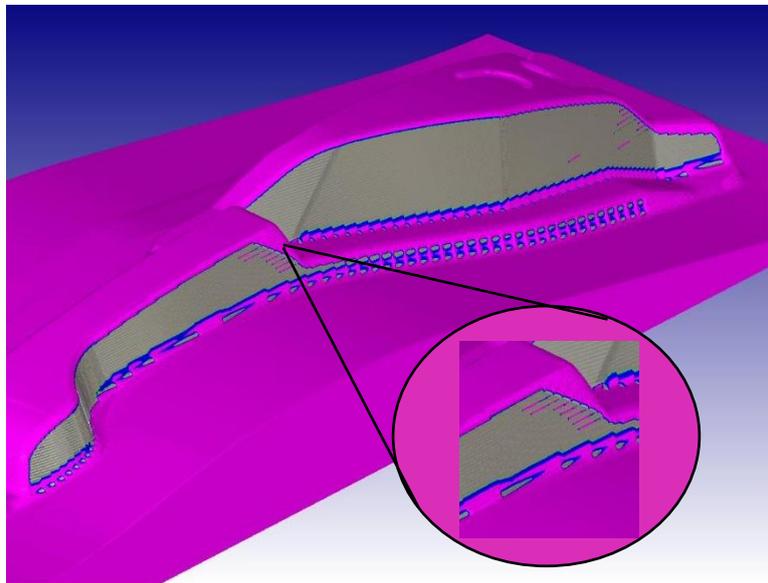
Finishing simulation with a spherical cutter on a 3-axes CNC machine.
